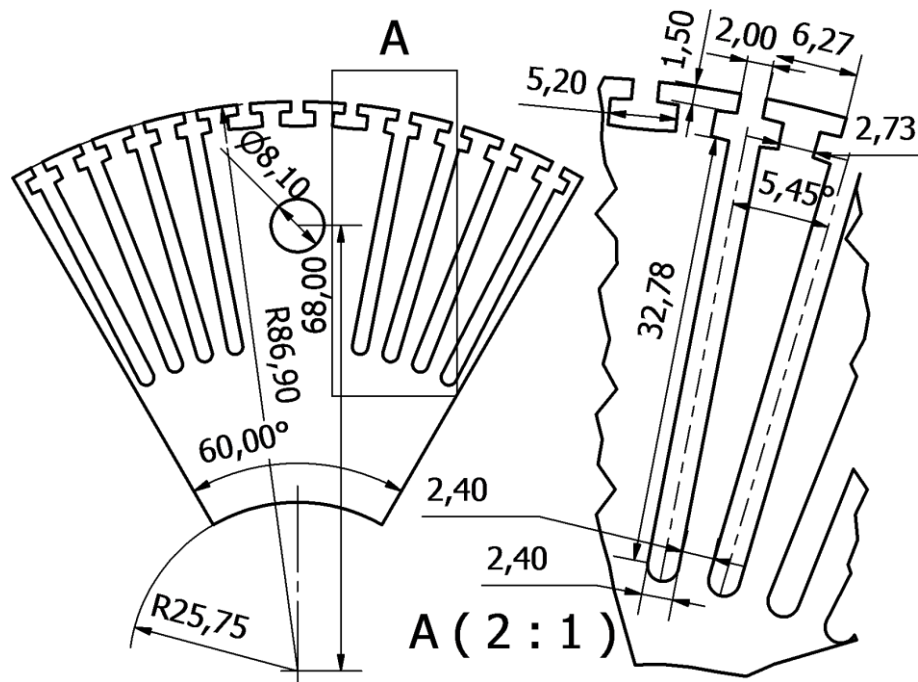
Dimensions of the cylindrical-rotor of the prototype main generator
